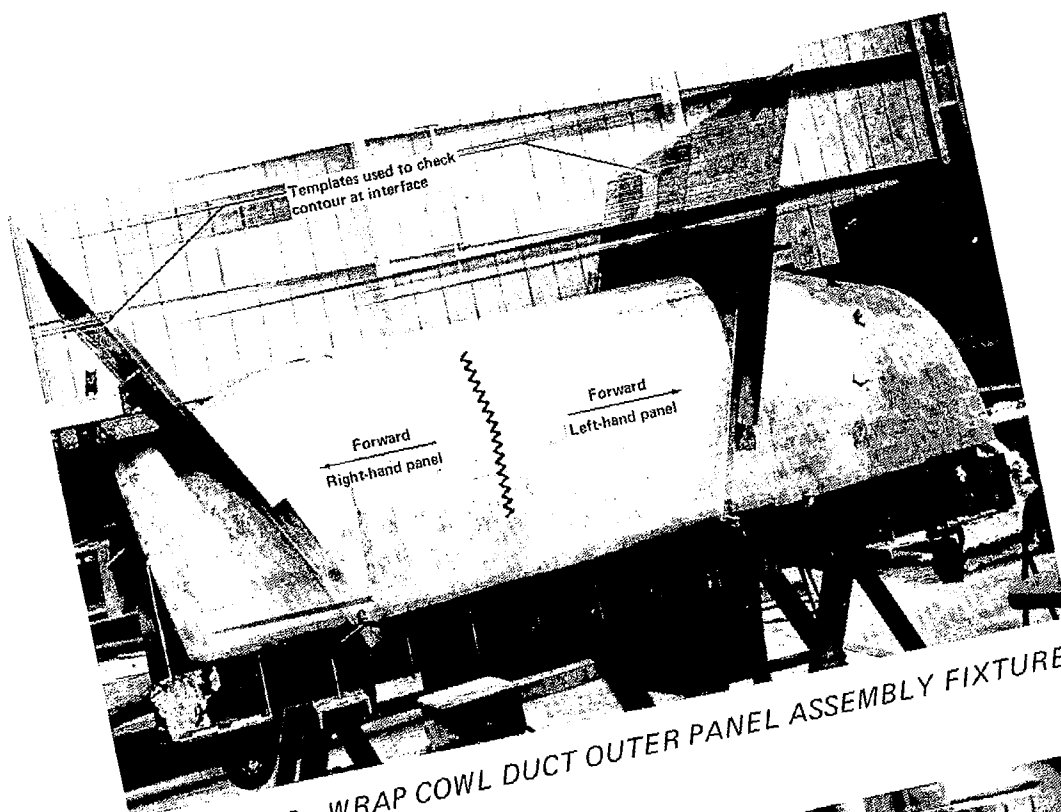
WRAP COWL DUCT OUTER PANEL ASSEMBLY FIXTURE
